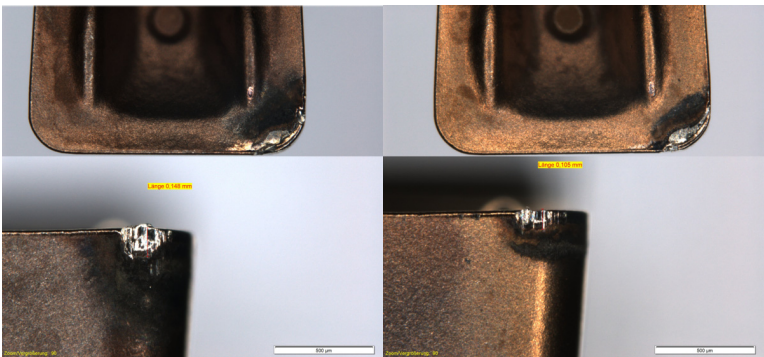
Light optical microscope pictures of cutting face (above) and tool flank (bottom) of cutting tools with AlTiSiN (left) coating system 7 (right) after 130 cut-ins.
